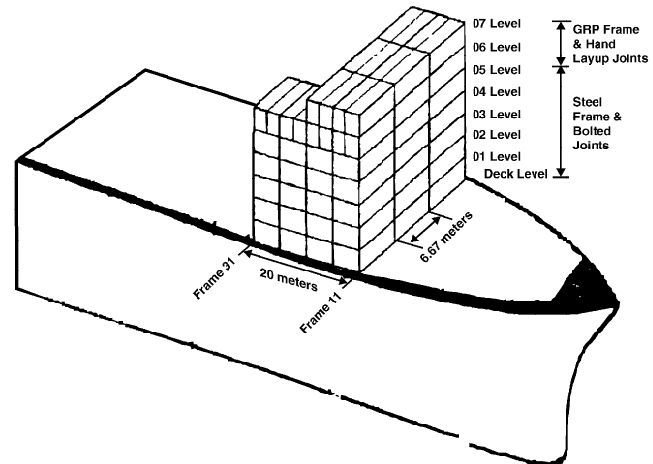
Arrangement of GRP Deckhouse Proposed for the SSTDP Sealift Ship [Scott Bartlett, NSWC]
